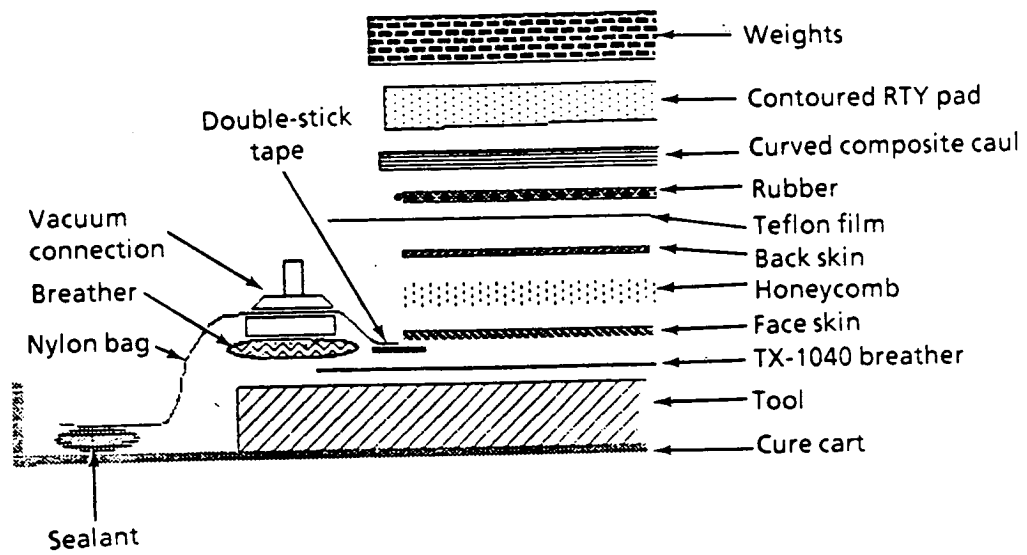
Schematic showing bonding setup used for assembly of VD type facets
